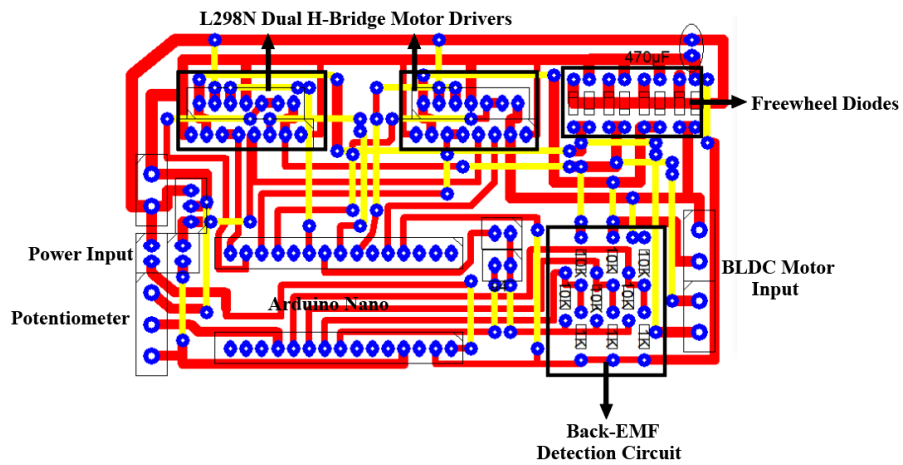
PCB of inverter circuit (Evireç devresinin baskı devresi)
